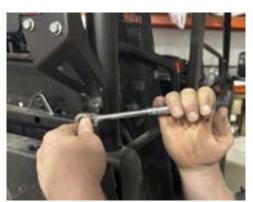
Tighten Frame Mounting bolts using a 13mm Socket
